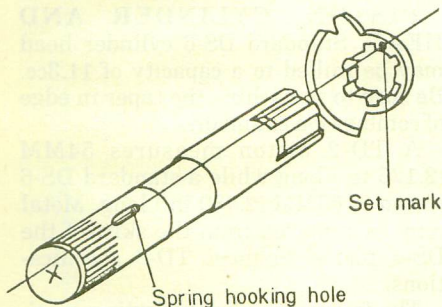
Mark on kickstarter gear should be aligned with spring hooking hole as shown.
